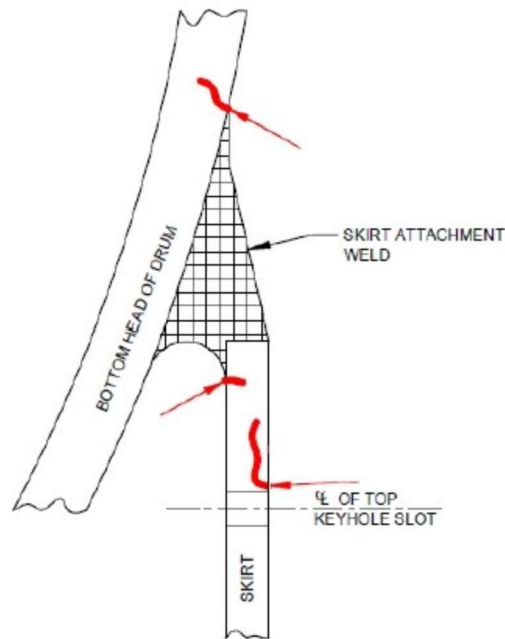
Typical Skirt Attachment Details and Dimensions—Dimensions May Vary by Licensor
